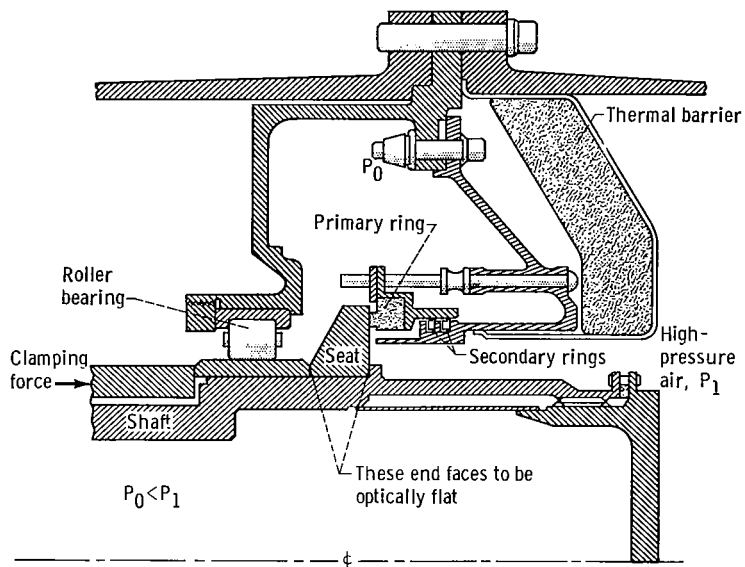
Bearing and face contact seal assembly with conventional seat mounting practice.
